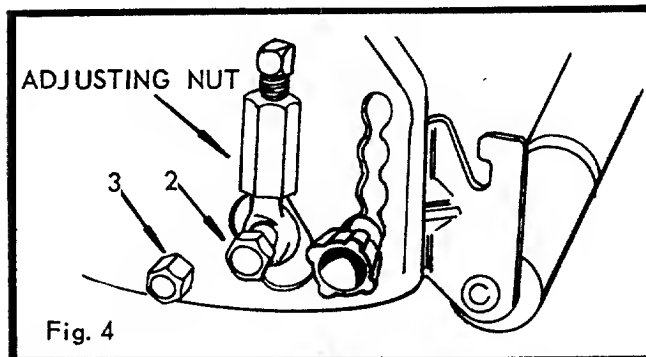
Cutter Bar bolts (2 & 3) are tapered and extend beyond the side plate slightly. When these tapered bolts are tight any end play or looseness is eliminated. Be sure these bolts are tight before making adjustments.
